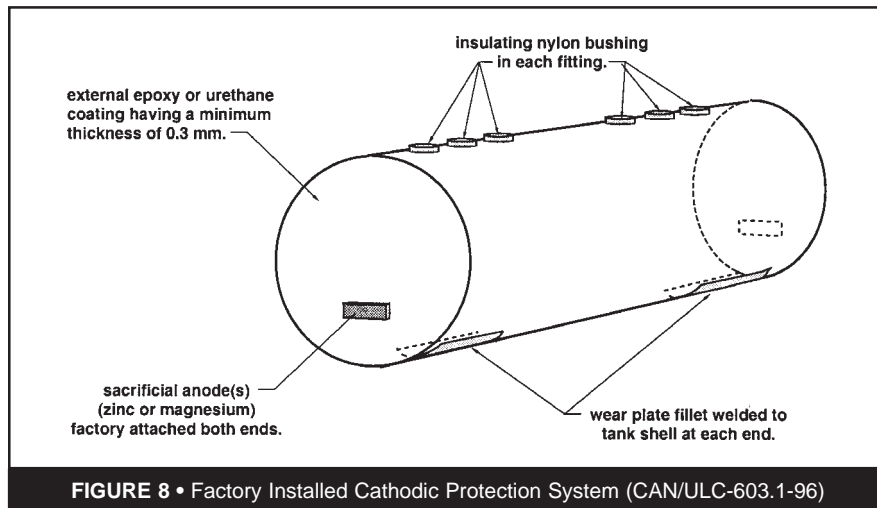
• Factory Installed Cathodic Protection System (CAN/ULC-603.1-96)
